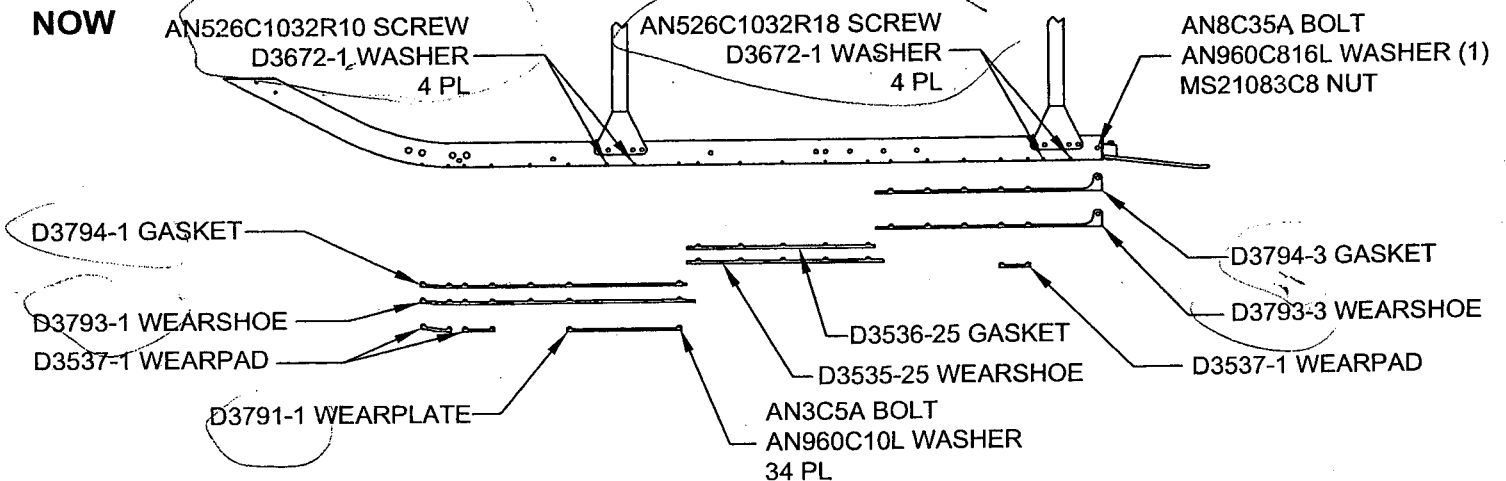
D350-636-011/-012/-013/-014 AT CHG 004 AND INSTALLATION OF DSI 9413-011
